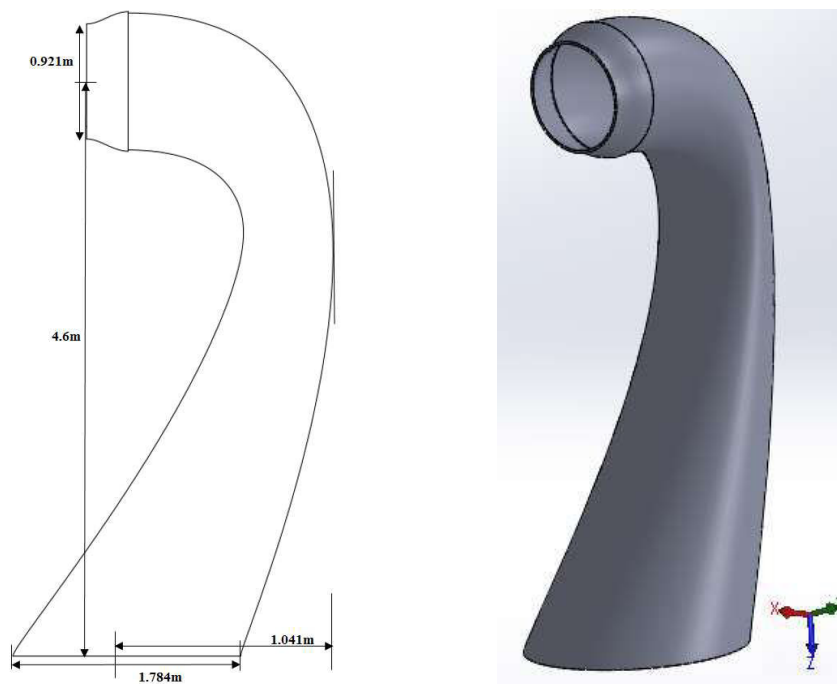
2-D and 3-D sketch of draft tube with dimension
